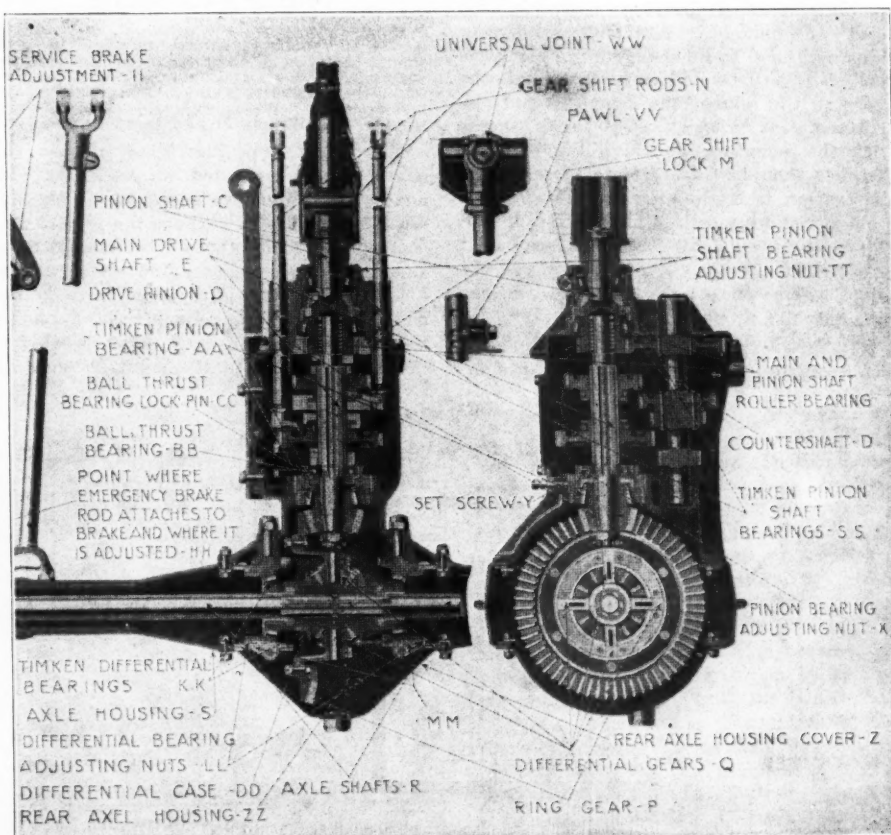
Sectional view of Studebaker rear axle, showing adjustments of bevel pinion and ring gear
